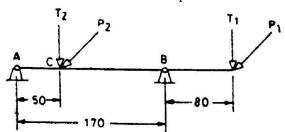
Schematic diagram of lathe spindle (All dimensions are in mm)
